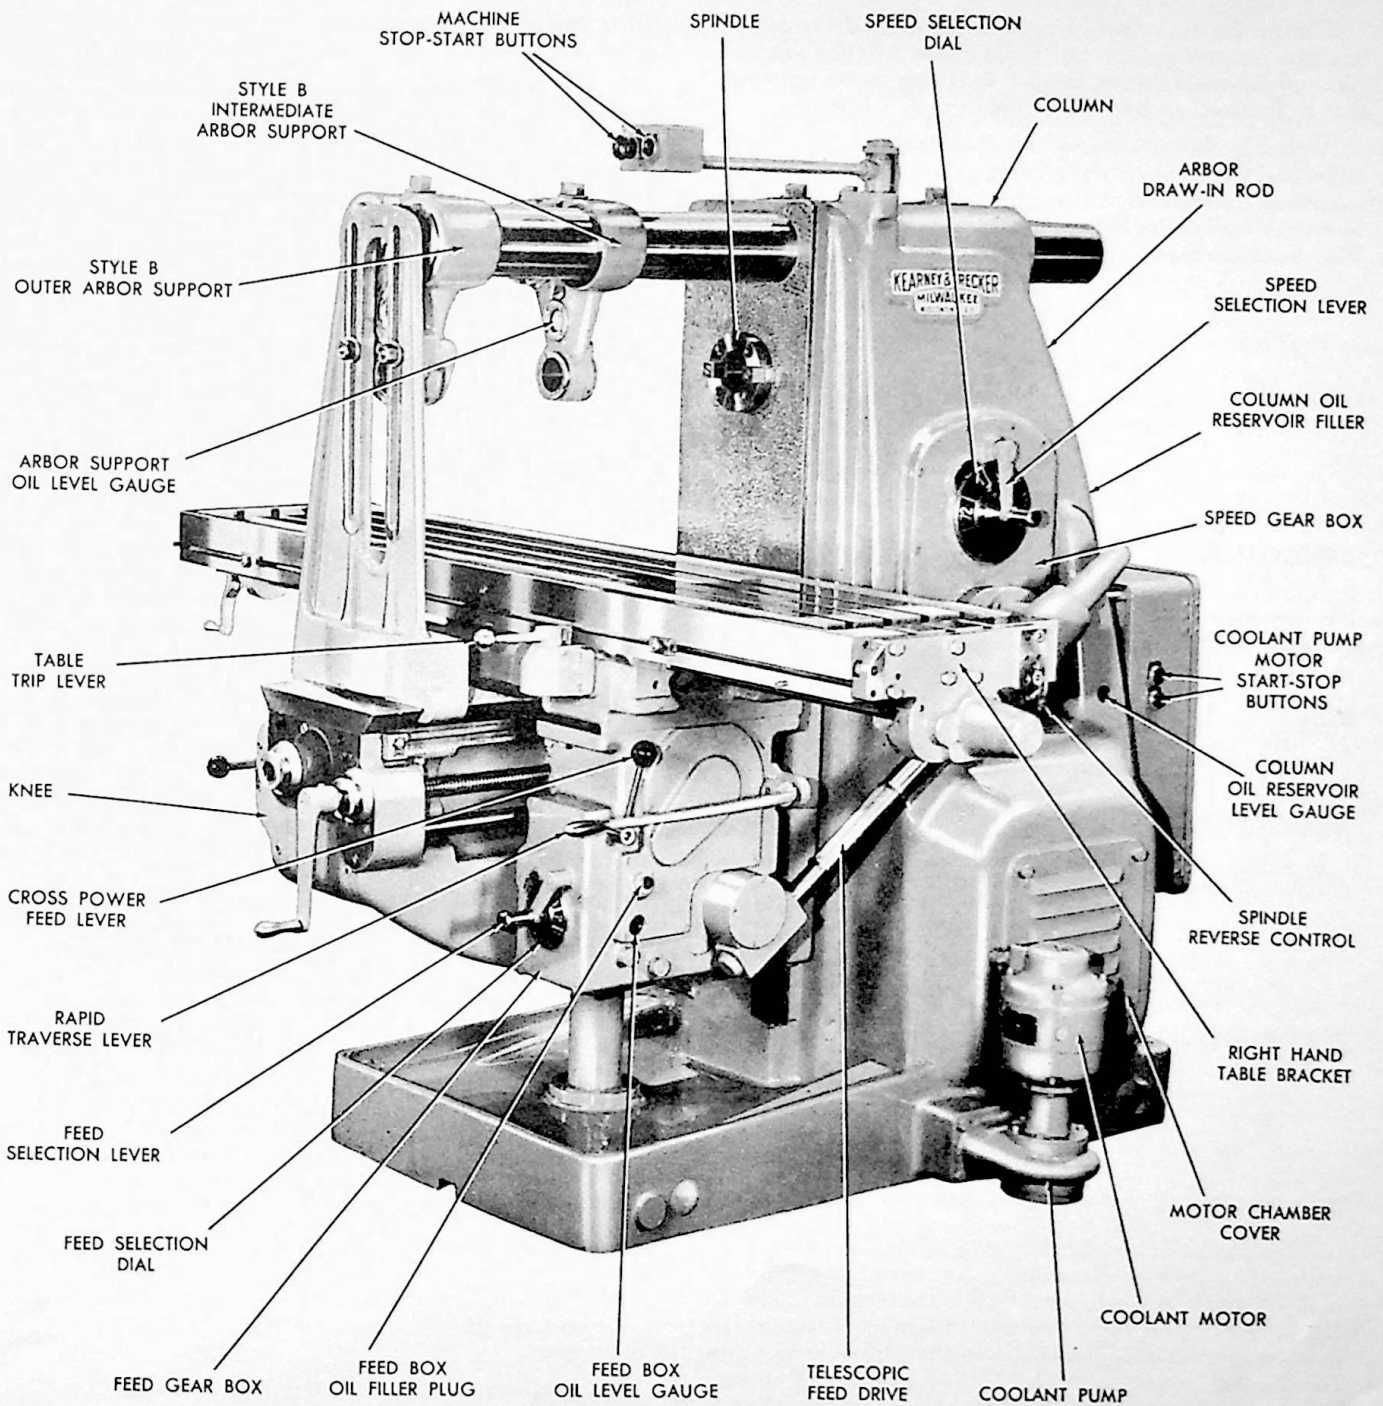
7 1/2hp No. 3 Model CE Plain Machine—right front view
